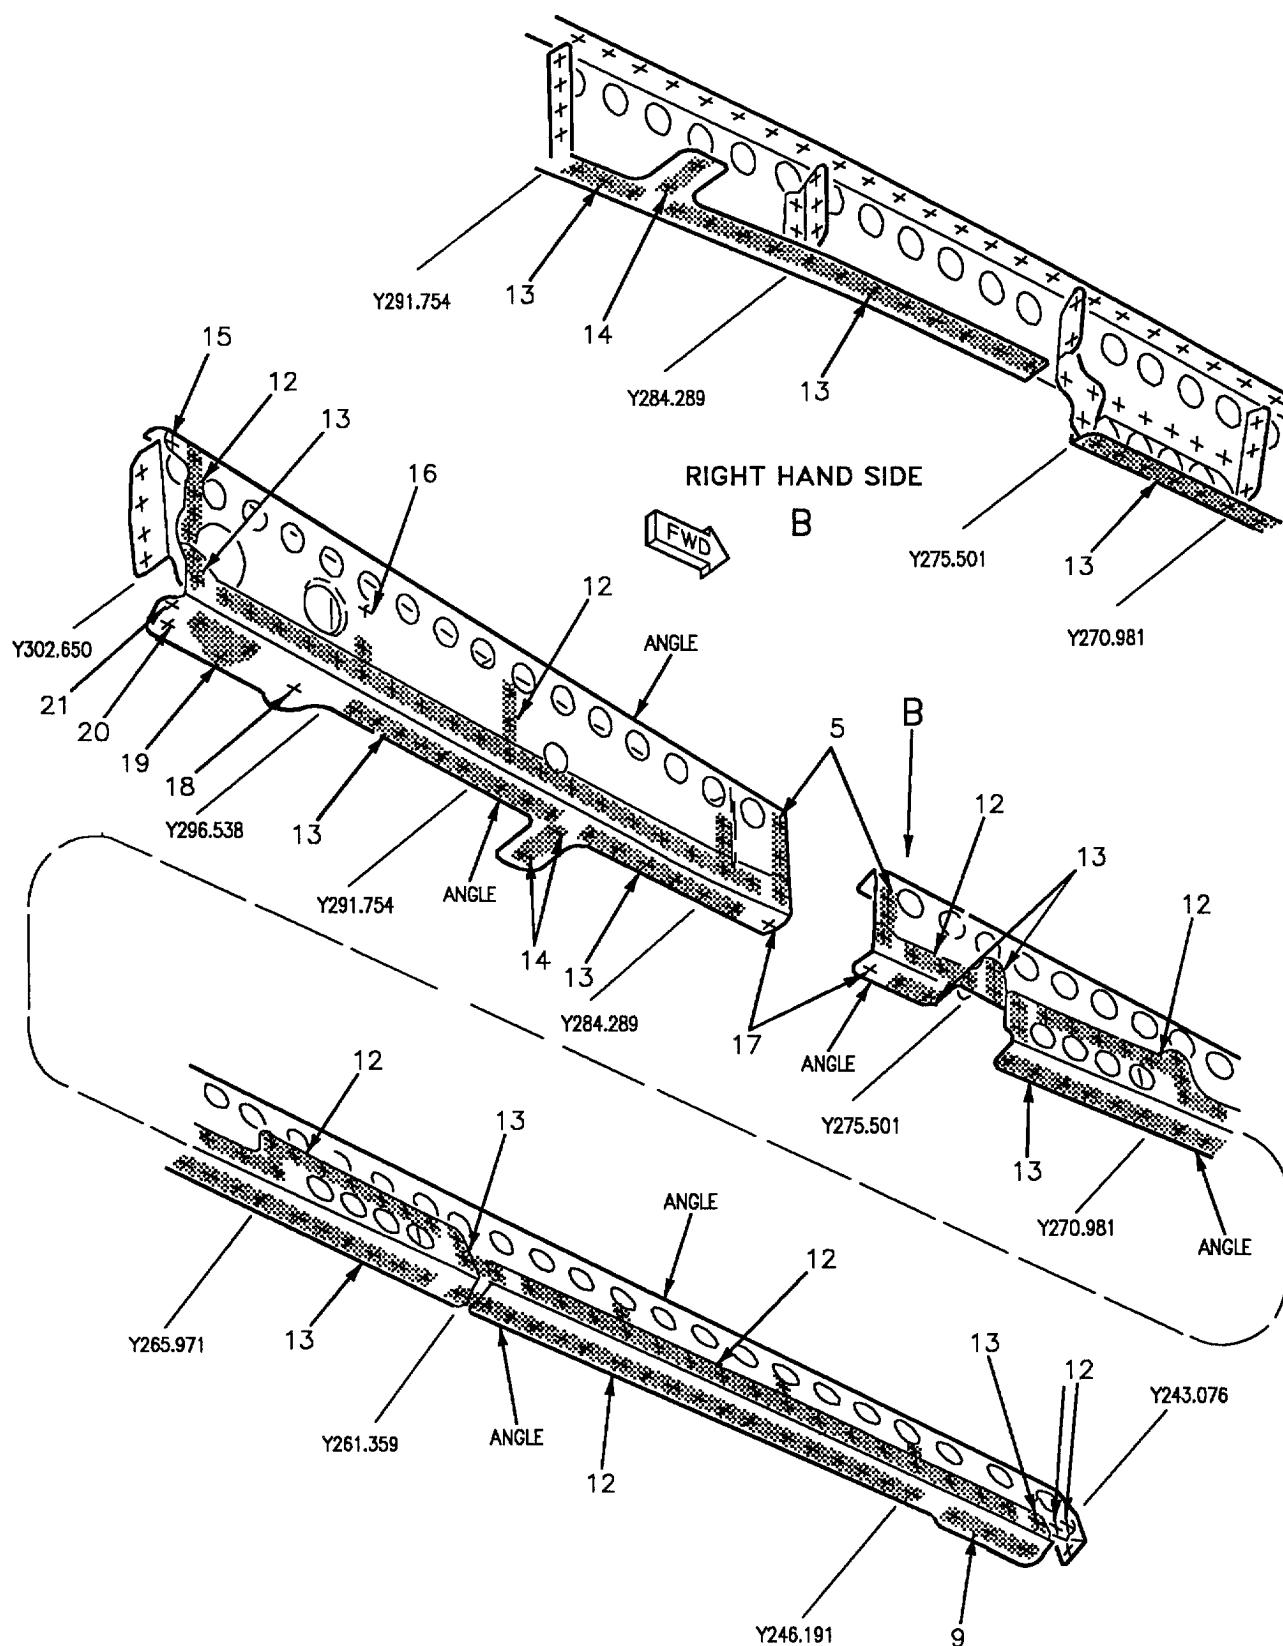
Channel, 74A350726, Fastener Index (Sheet 2)
